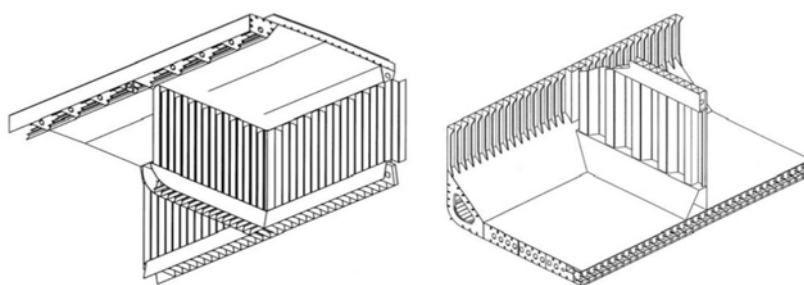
Transverse and longitudinal watertight bulkhead with the girder structure in a liquid bulk carrier
